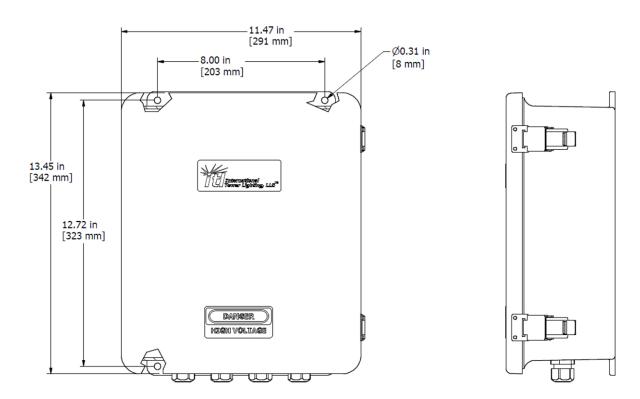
Mounting Details and Dimensions of Enclosure Panel
